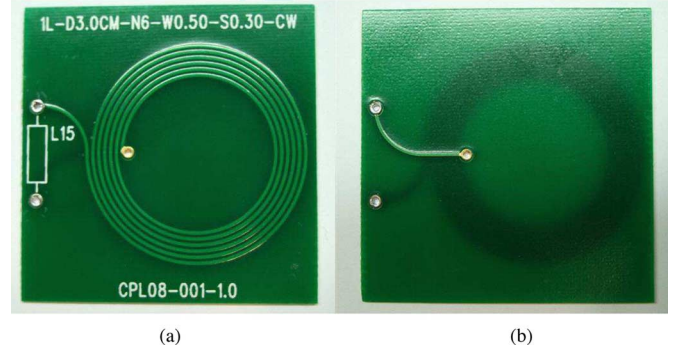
Photo of the tested PCB planar spiral winding. (a) Top side. (b) Bottom side.
